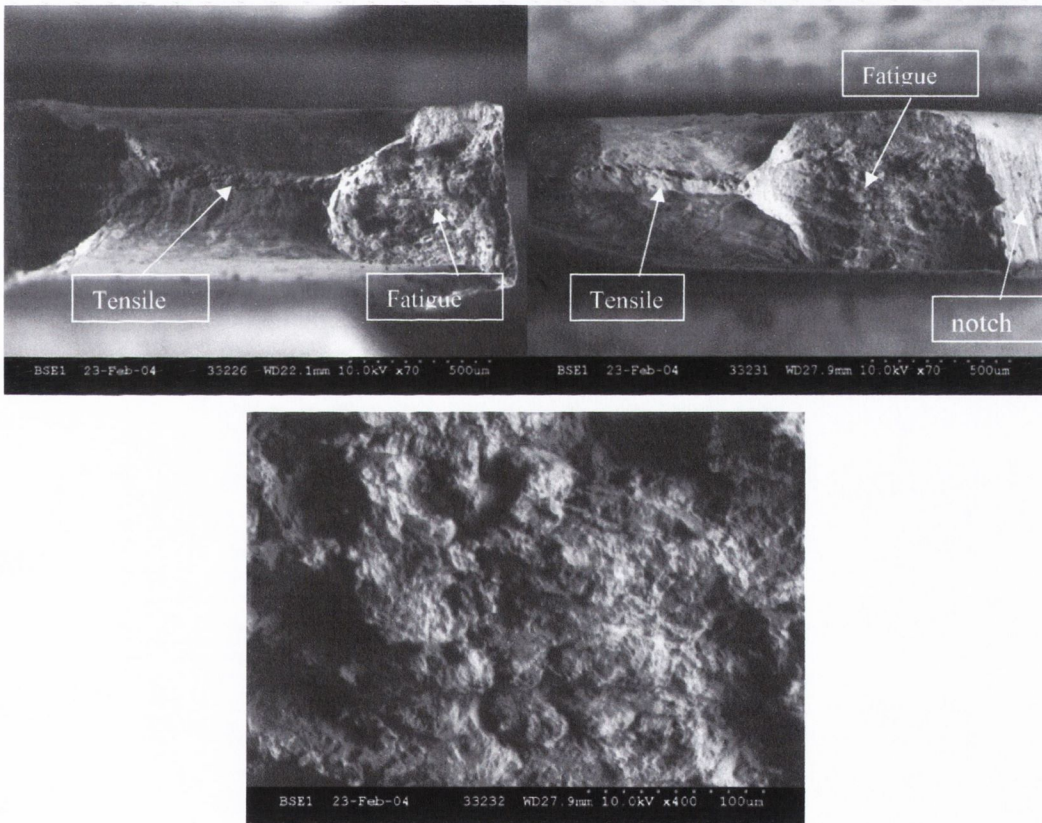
Fatigue fracture surface of a plain aluminium plate
